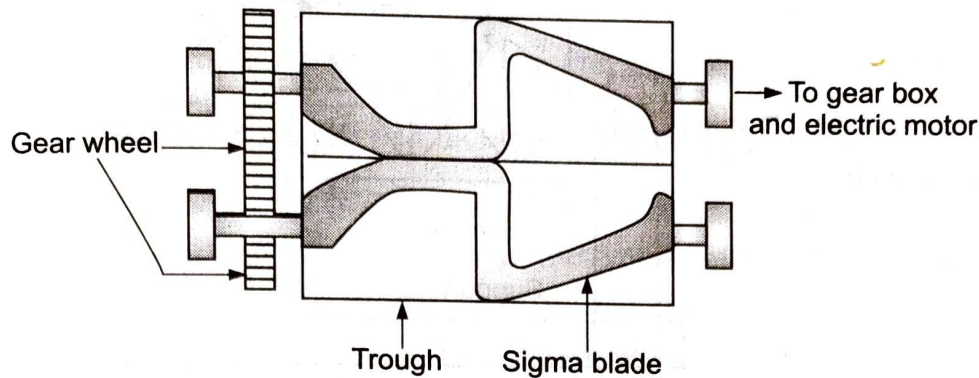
Kneading Machine/Double arm kneader (sigma mixer) – top view
